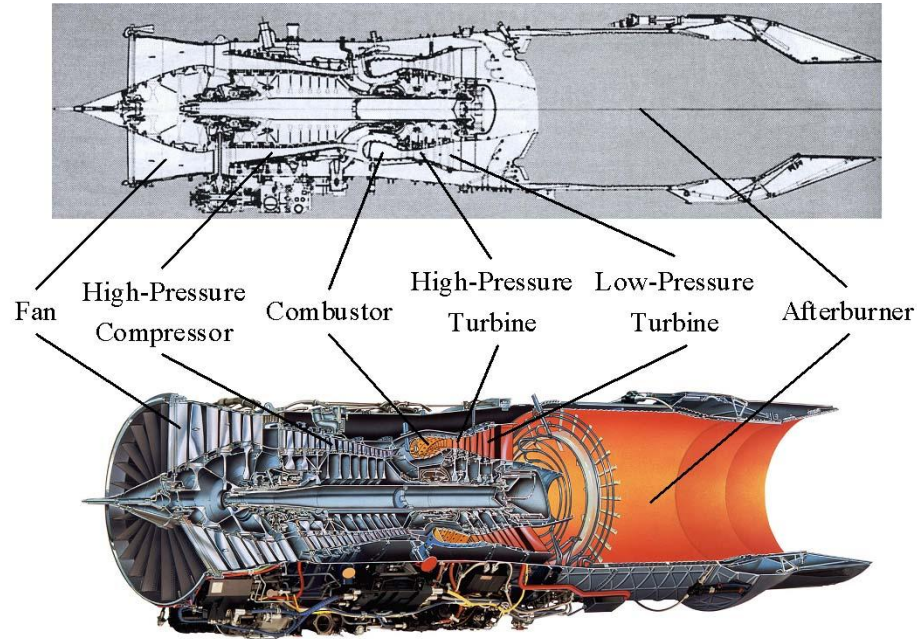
Sectional view of the F100-PW229 engine [81, 82].
